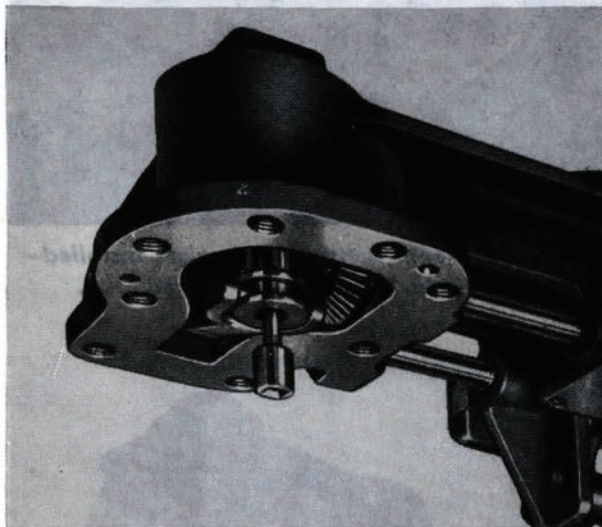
Depth Setting Mechanism—Bottom View—Spindle IN.
